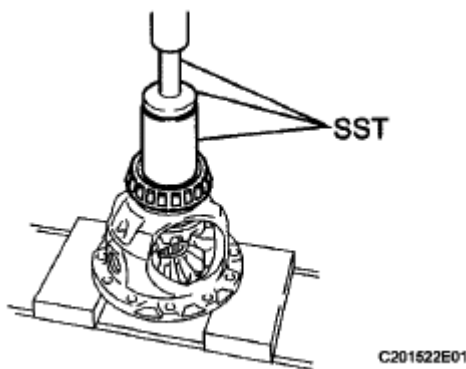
Installing Front Differential Case Front Tapered Roller Bearing To And
